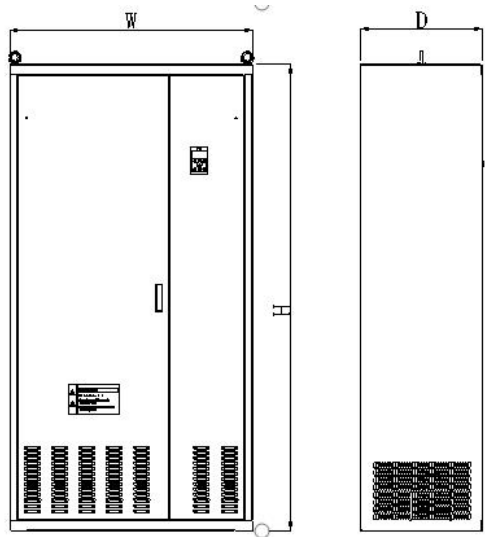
400~500KW VFD External Dimensions and Installation Dimensions Diagram
